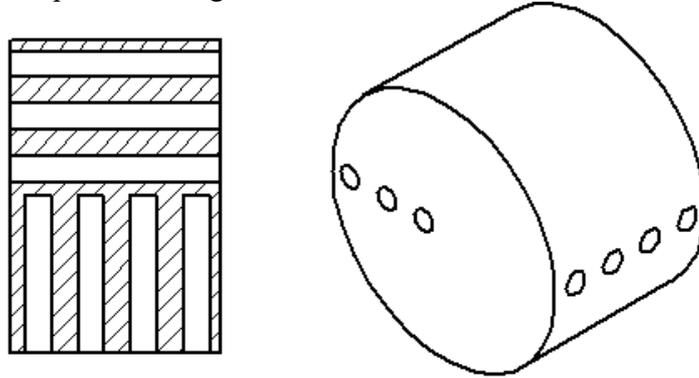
Billet: section and isometric views showing the holes for the contrast pins
